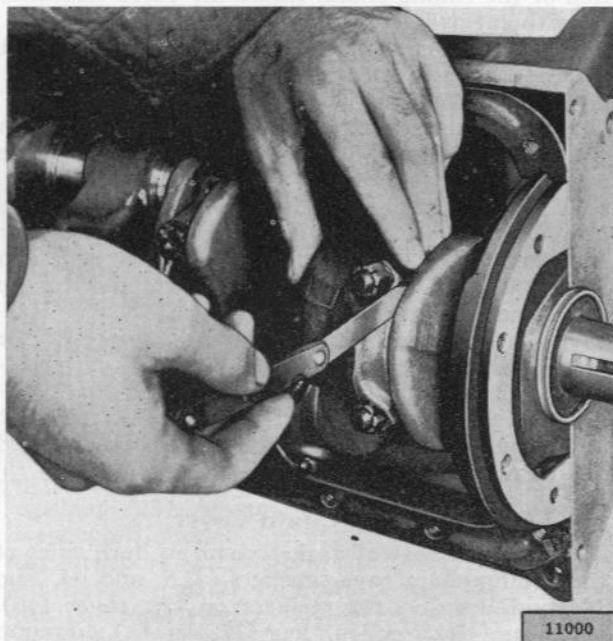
CHECKING CONNECTING ROD SIDE CLEARANCE
